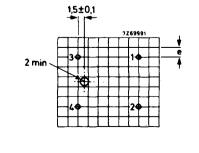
Hole pattern for mounting on a printedwiring board (component side). Hole diameter 1,3 + 0,1 mm. e = 2,54 mm (0,1 in).
